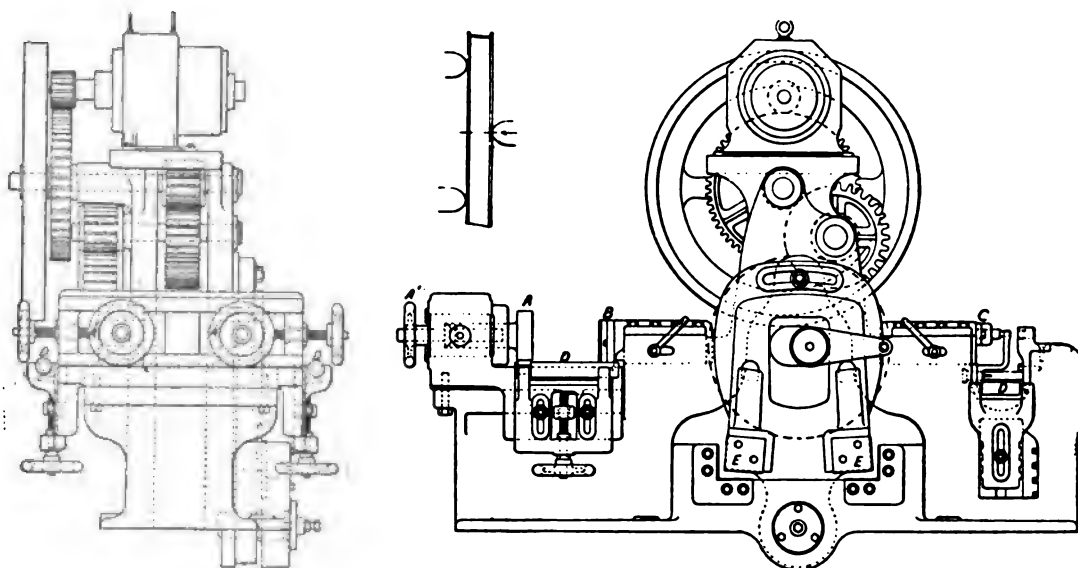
Beam Bending Machine. (Rushworth & Co., Sowerby Bridge.)
